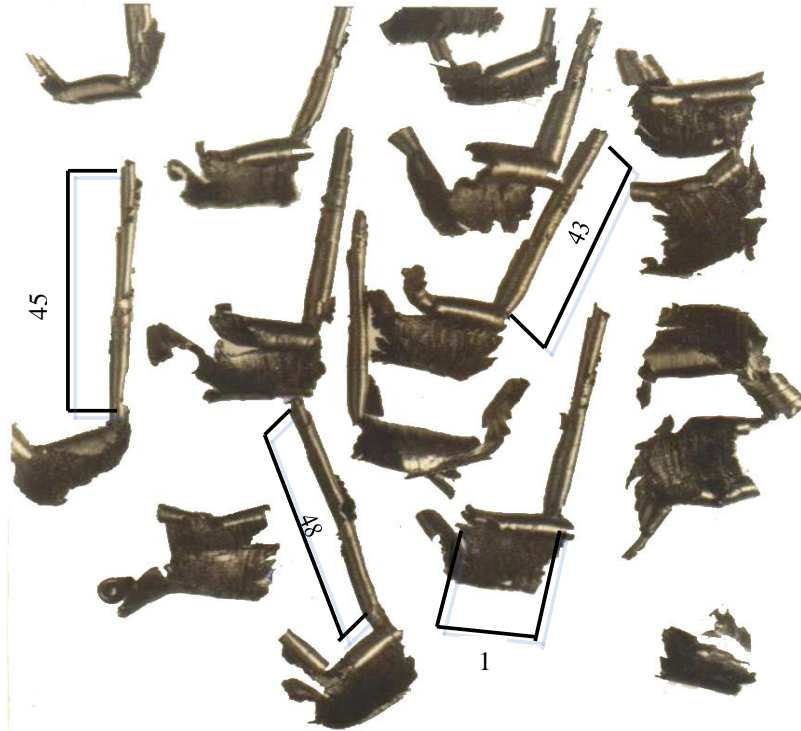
Chips cut by the finishing cutter ($\tau=20$ mm) without teeth cutting by a cutter with a prominence
